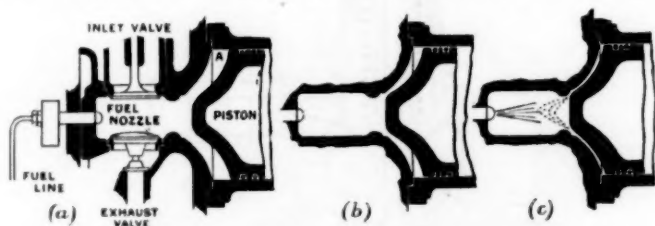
GUNTHER'S ENGINE AS FINALLY BUILT
